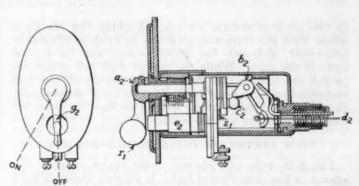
Locked Position of the Lock Controlling the Intake-Manifold Valve
